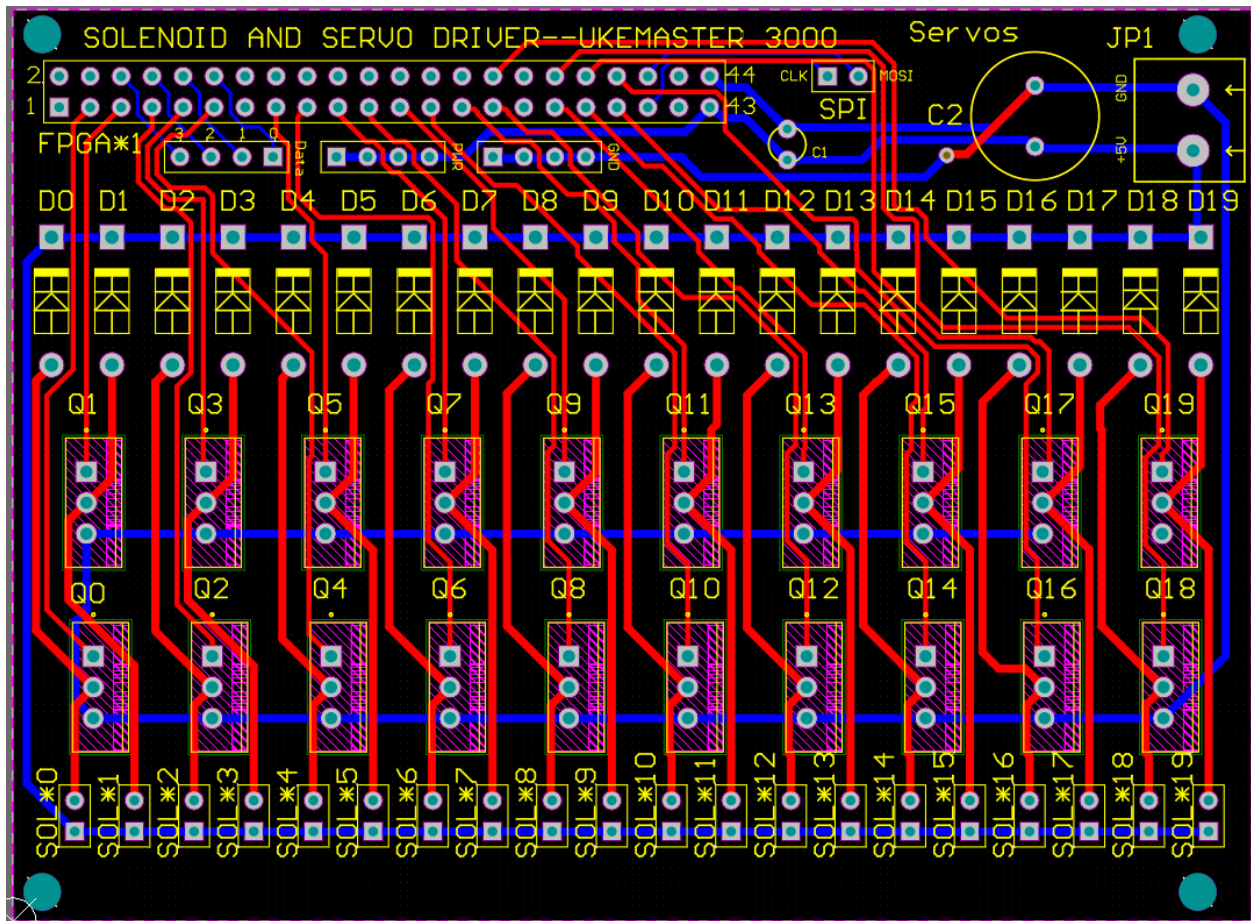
Schematic for the solenoid and servo motor controller PCB.
